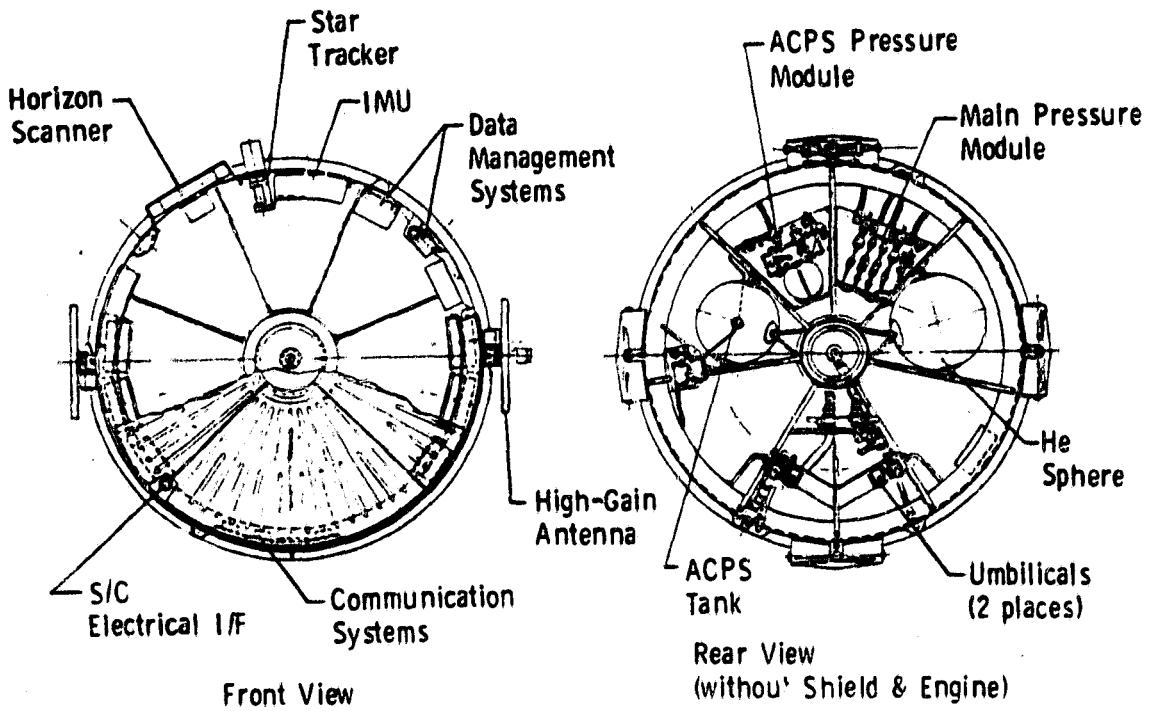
Final Option 1 Interim Tug Inboard End Views
